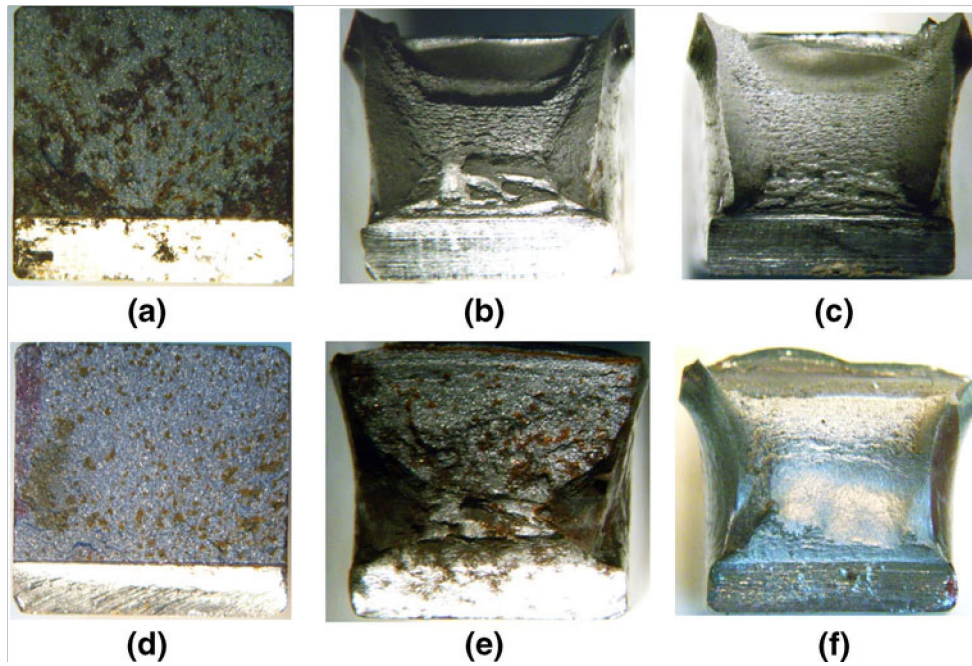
Macrographs showing the fracture surfaces of the S690 QL CVN specimens. As received condition: (a) -196 °C, (b) -60 °C, (c) 20 °C. Flame heated condition: (d) -196 °C, (e) -110 °C, (f) 250 °C
